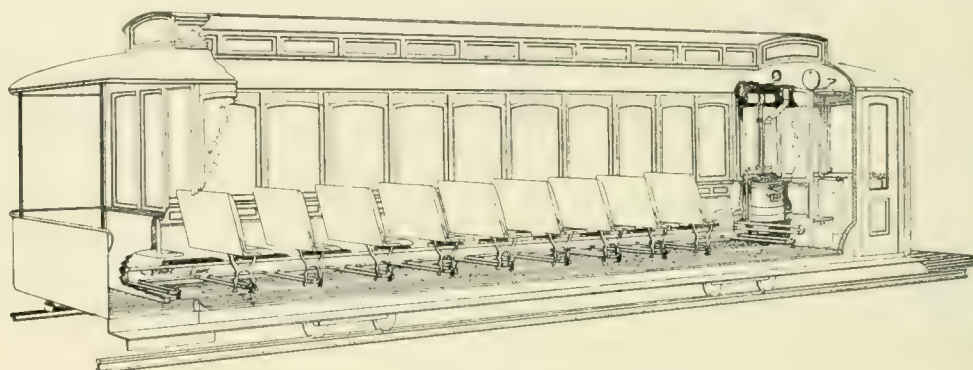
CAR EQUIPPED WITH THE SYSTEM.
